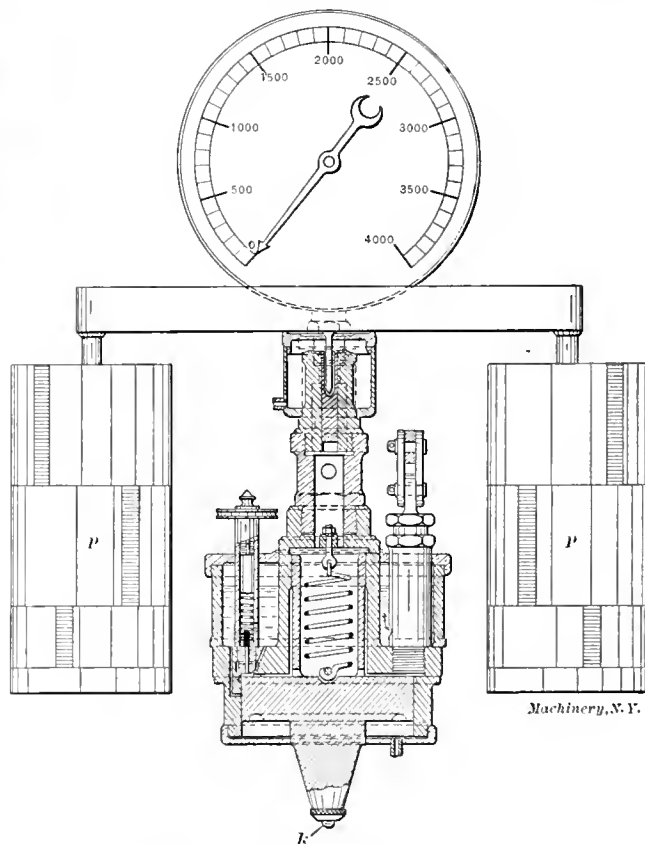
Section of Press Cylinder of Machine in Fig. 2.
